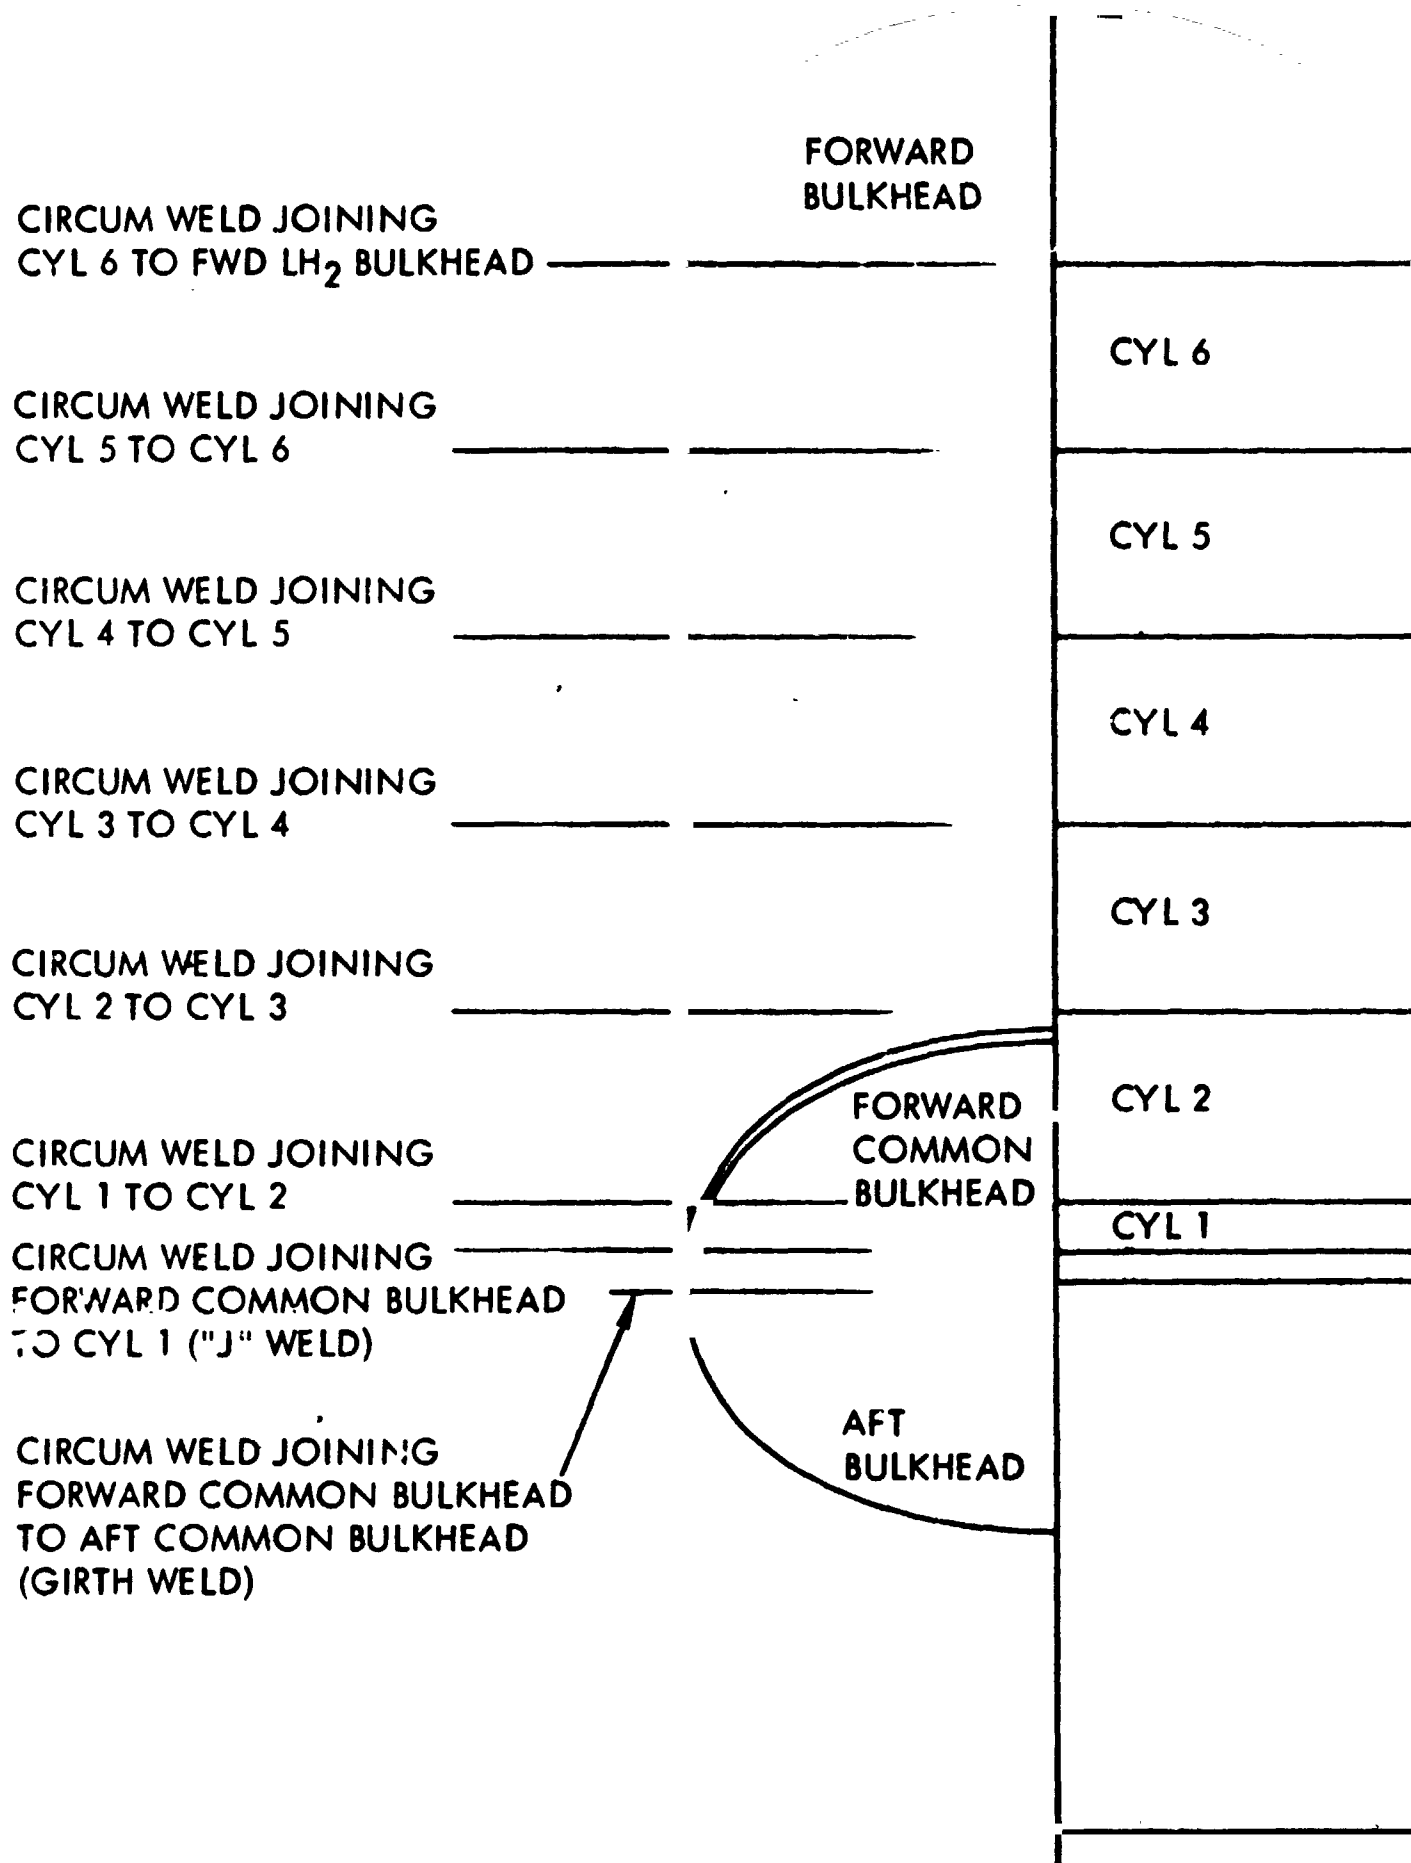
Saturn S-II Circumferential Welds
